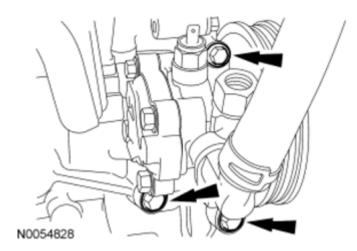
Locating Power Steering Pump Bolts Courtesy of FORD MOTOR CO.
